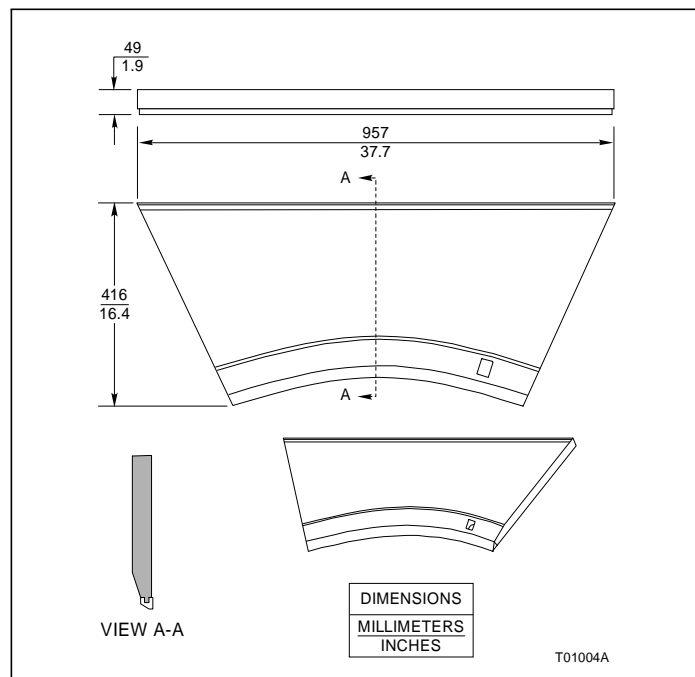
Auxiliary Panel Work Surface S1 Dimensions
